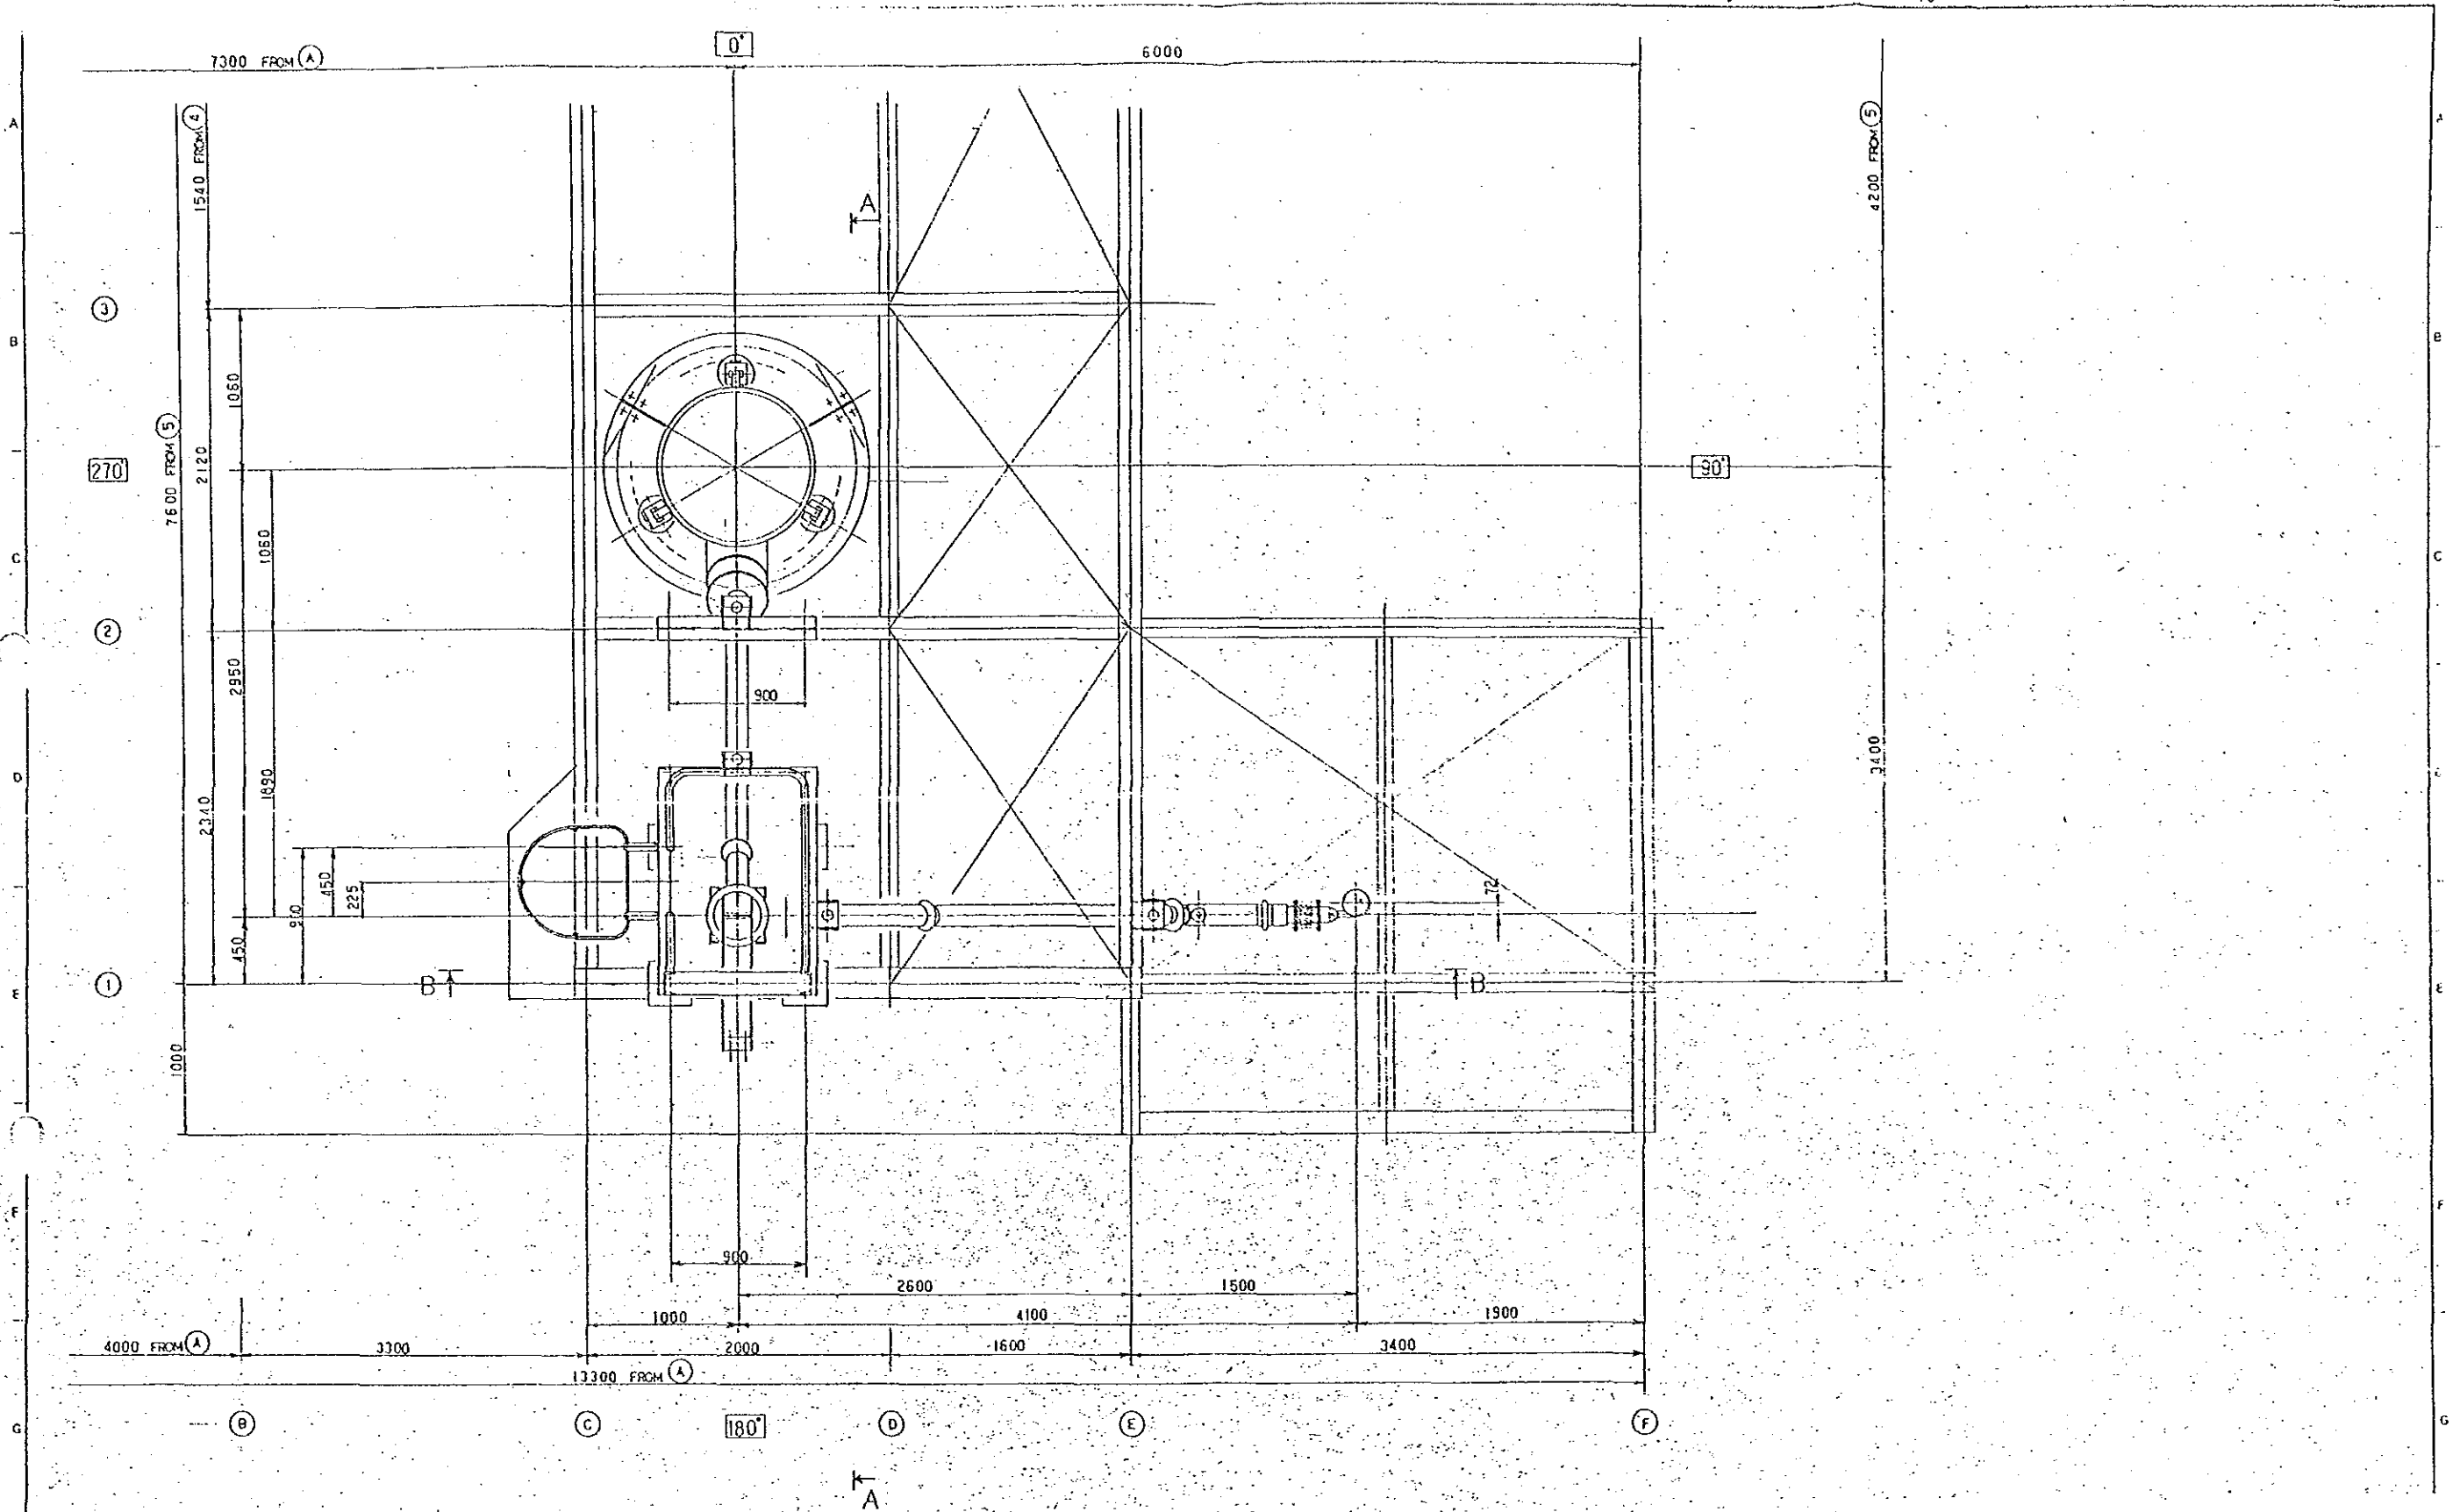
Assemble drawing of produced gas filtration system(1)
